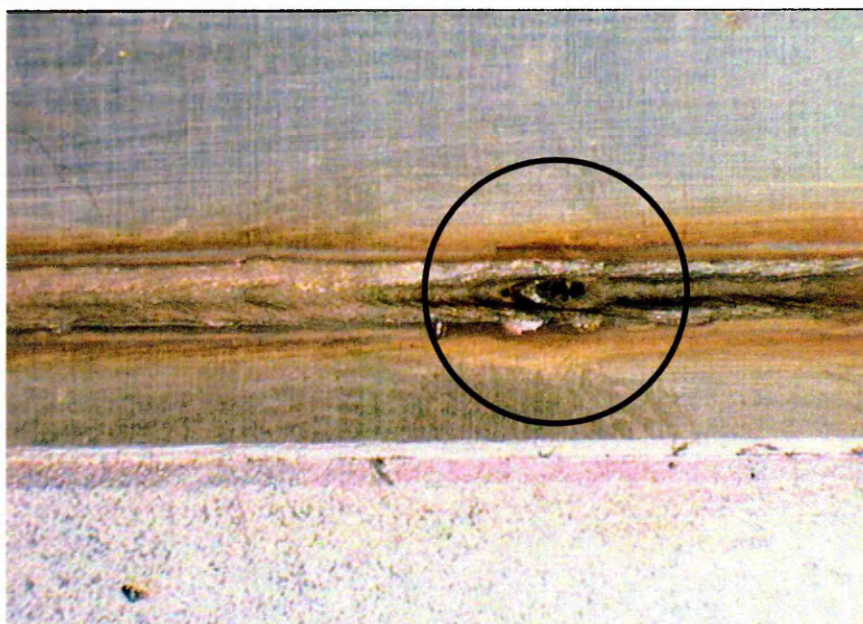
Weld bead surface porosity in a 1mm 2205 (top) – 1.2mm V1437 laser welded lap joint
